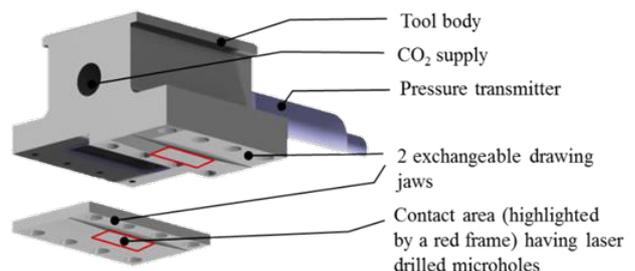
Modified drawing tool for CO_2 lubrication in strip drawing test [21].
